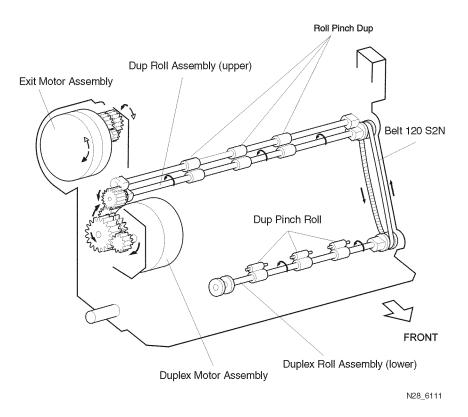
Drive Power Transmission through Duplex Assembly Gears
